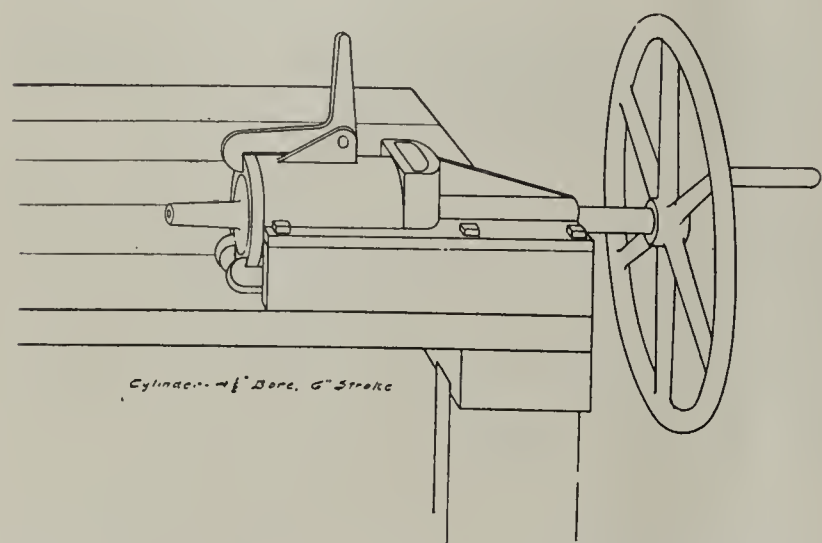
Screw Press and Die for Making Sample Testing Pieces.
